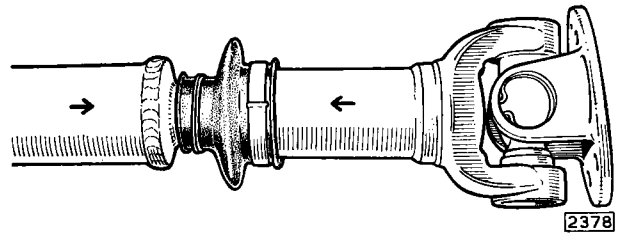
Showing the arrows on the sliding joint and drive shaft
